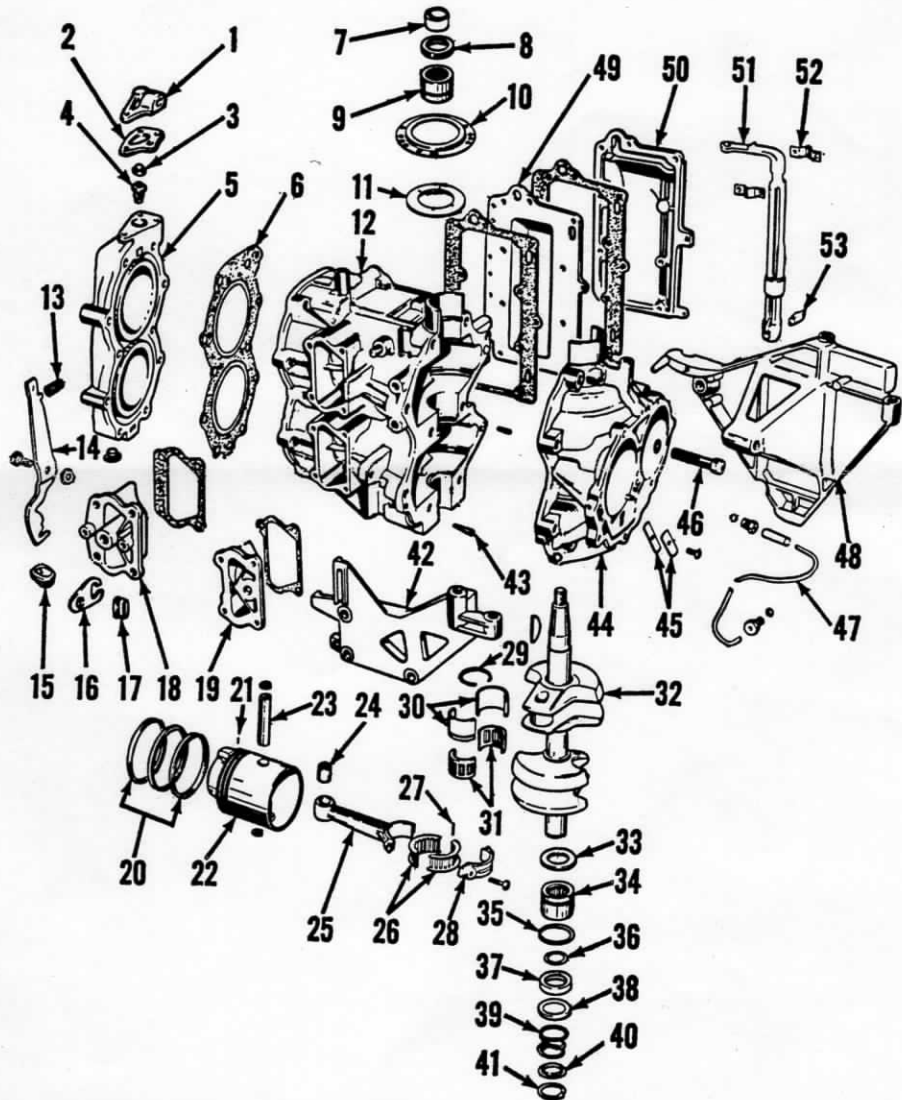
Late model power head. Early models are similar except thermostat is not used. Flat side of magneto armature plate retainer (11) should be toward top of motor.
